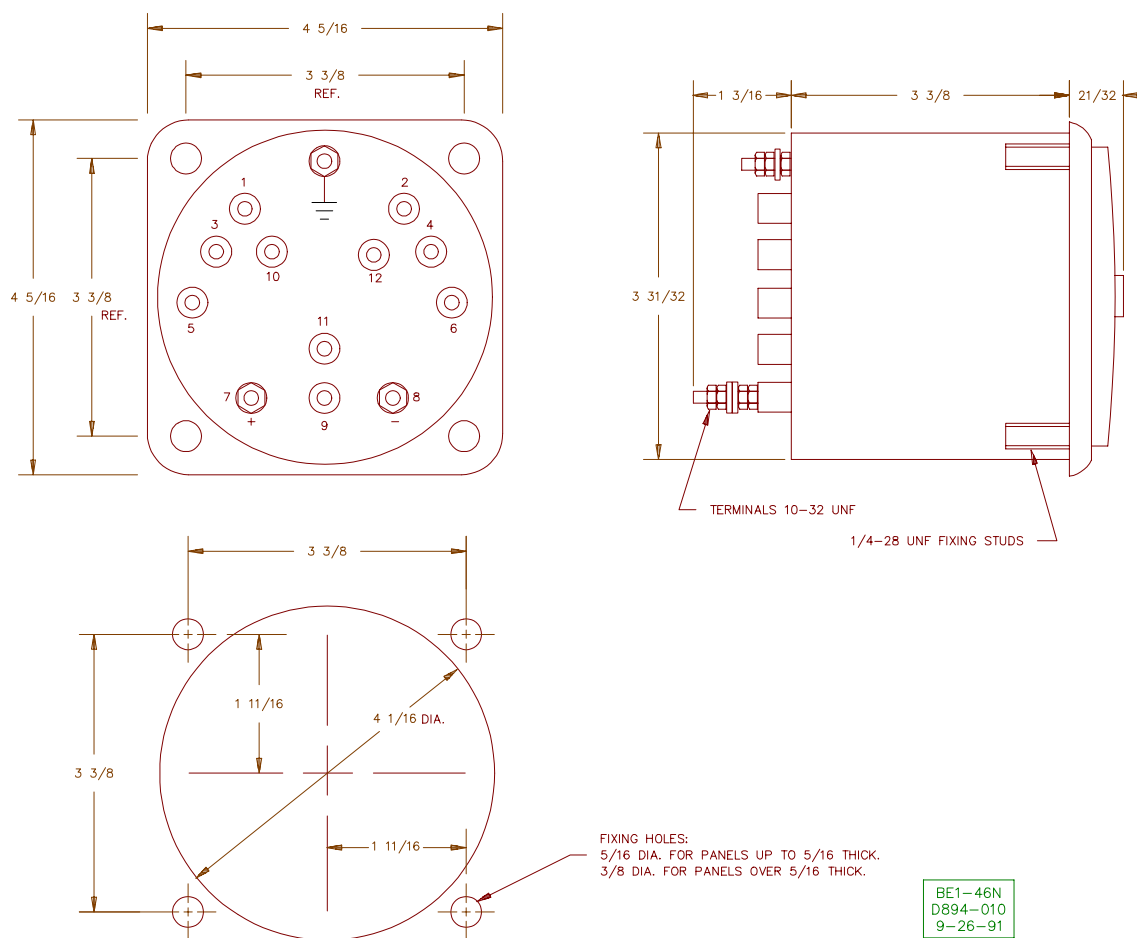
Remote Meter Dimensions and Drilling Diagram
